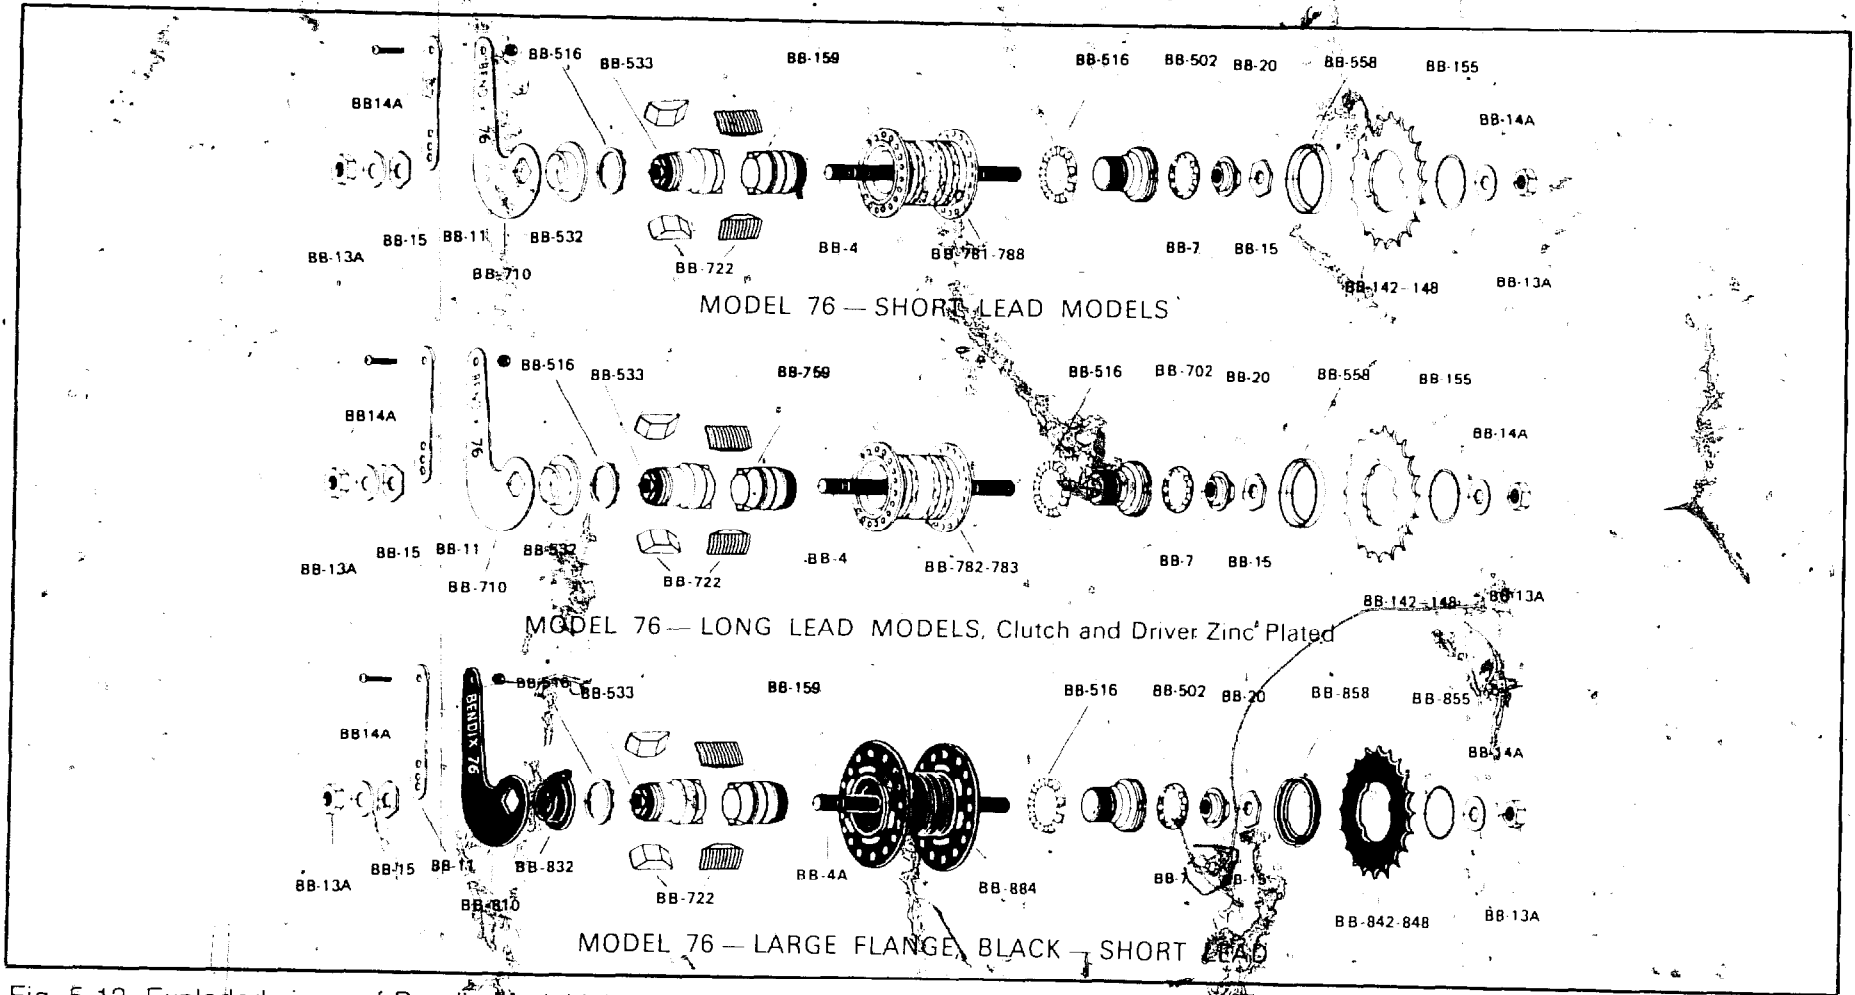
Exploded views of Bendix Model 76 coaster brakes.
